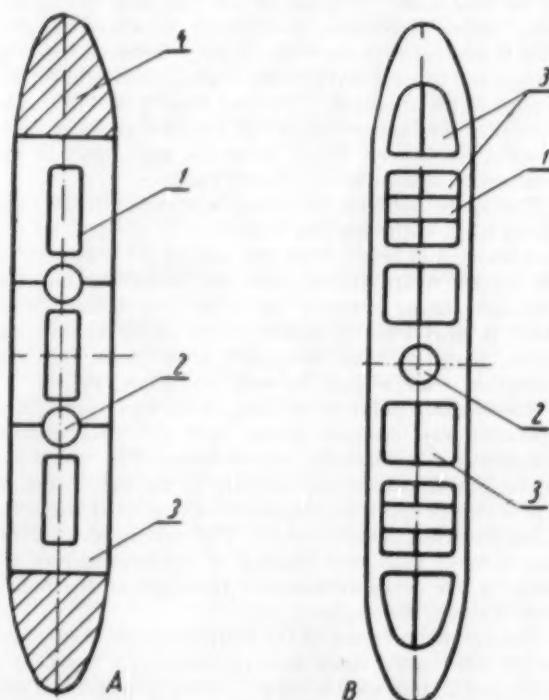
Corner burner design, left, above, caused intensive corrosion of tube surfaces, Fig. 5. Rebuilding to design, right, above, corrected the trouble.
